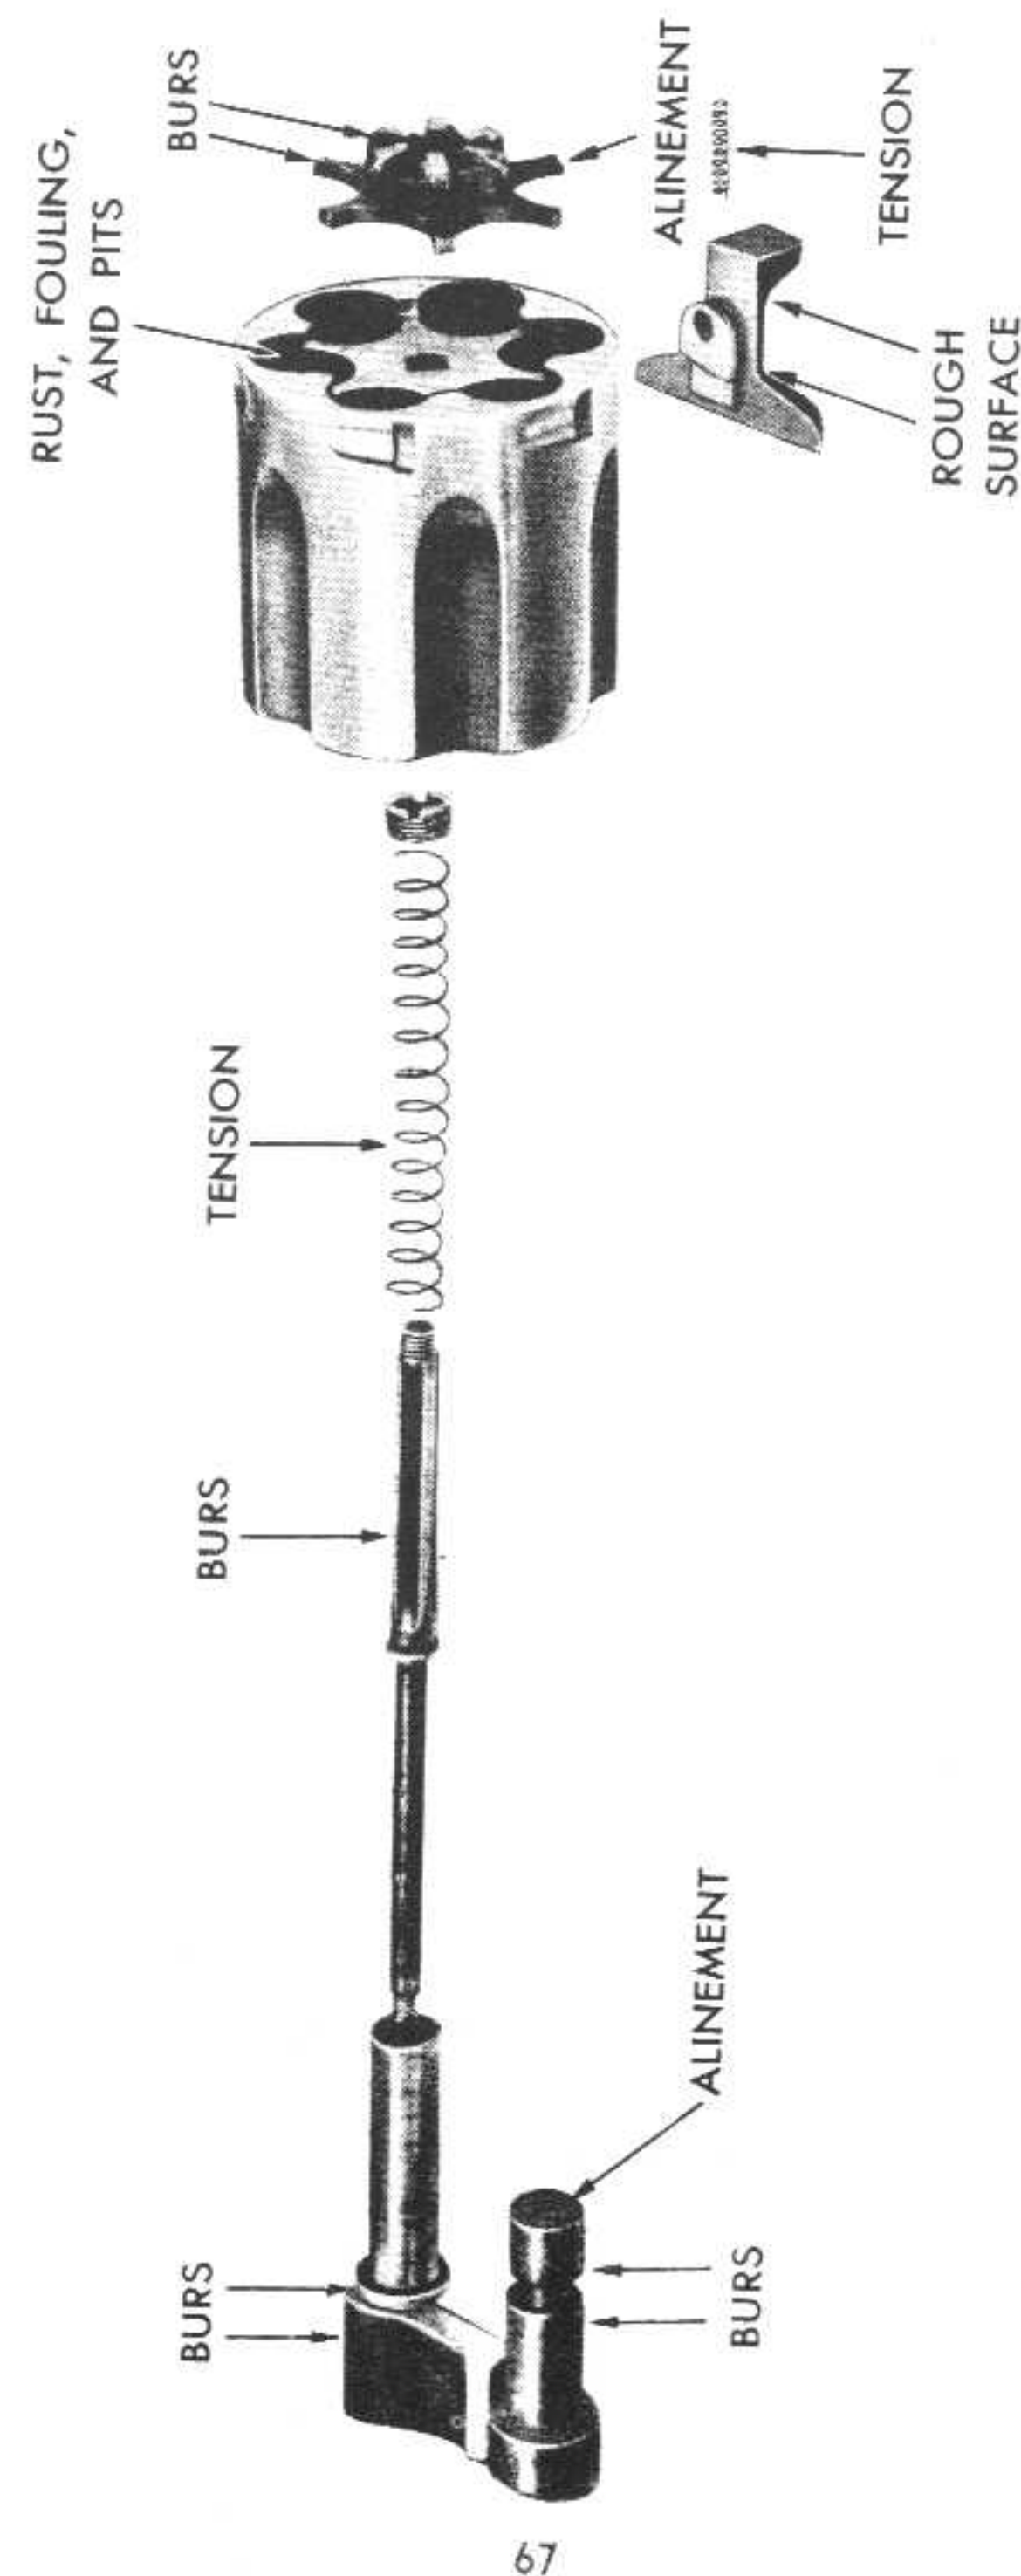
Colt Revolver M1917, Cylinder Assembly, Showing Points to Be Inspected
